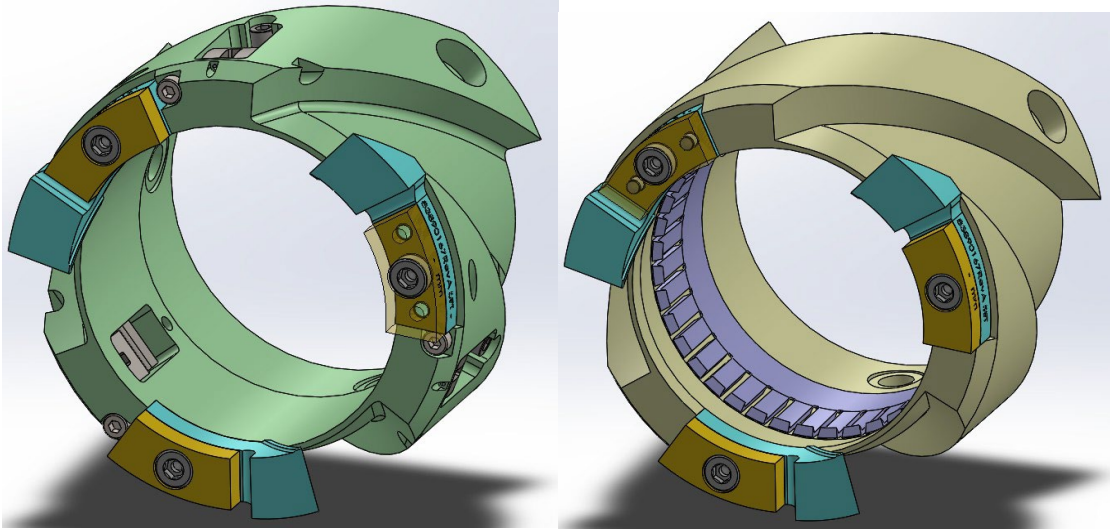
Core dog cutter head (left), Collet cutter head (right).
